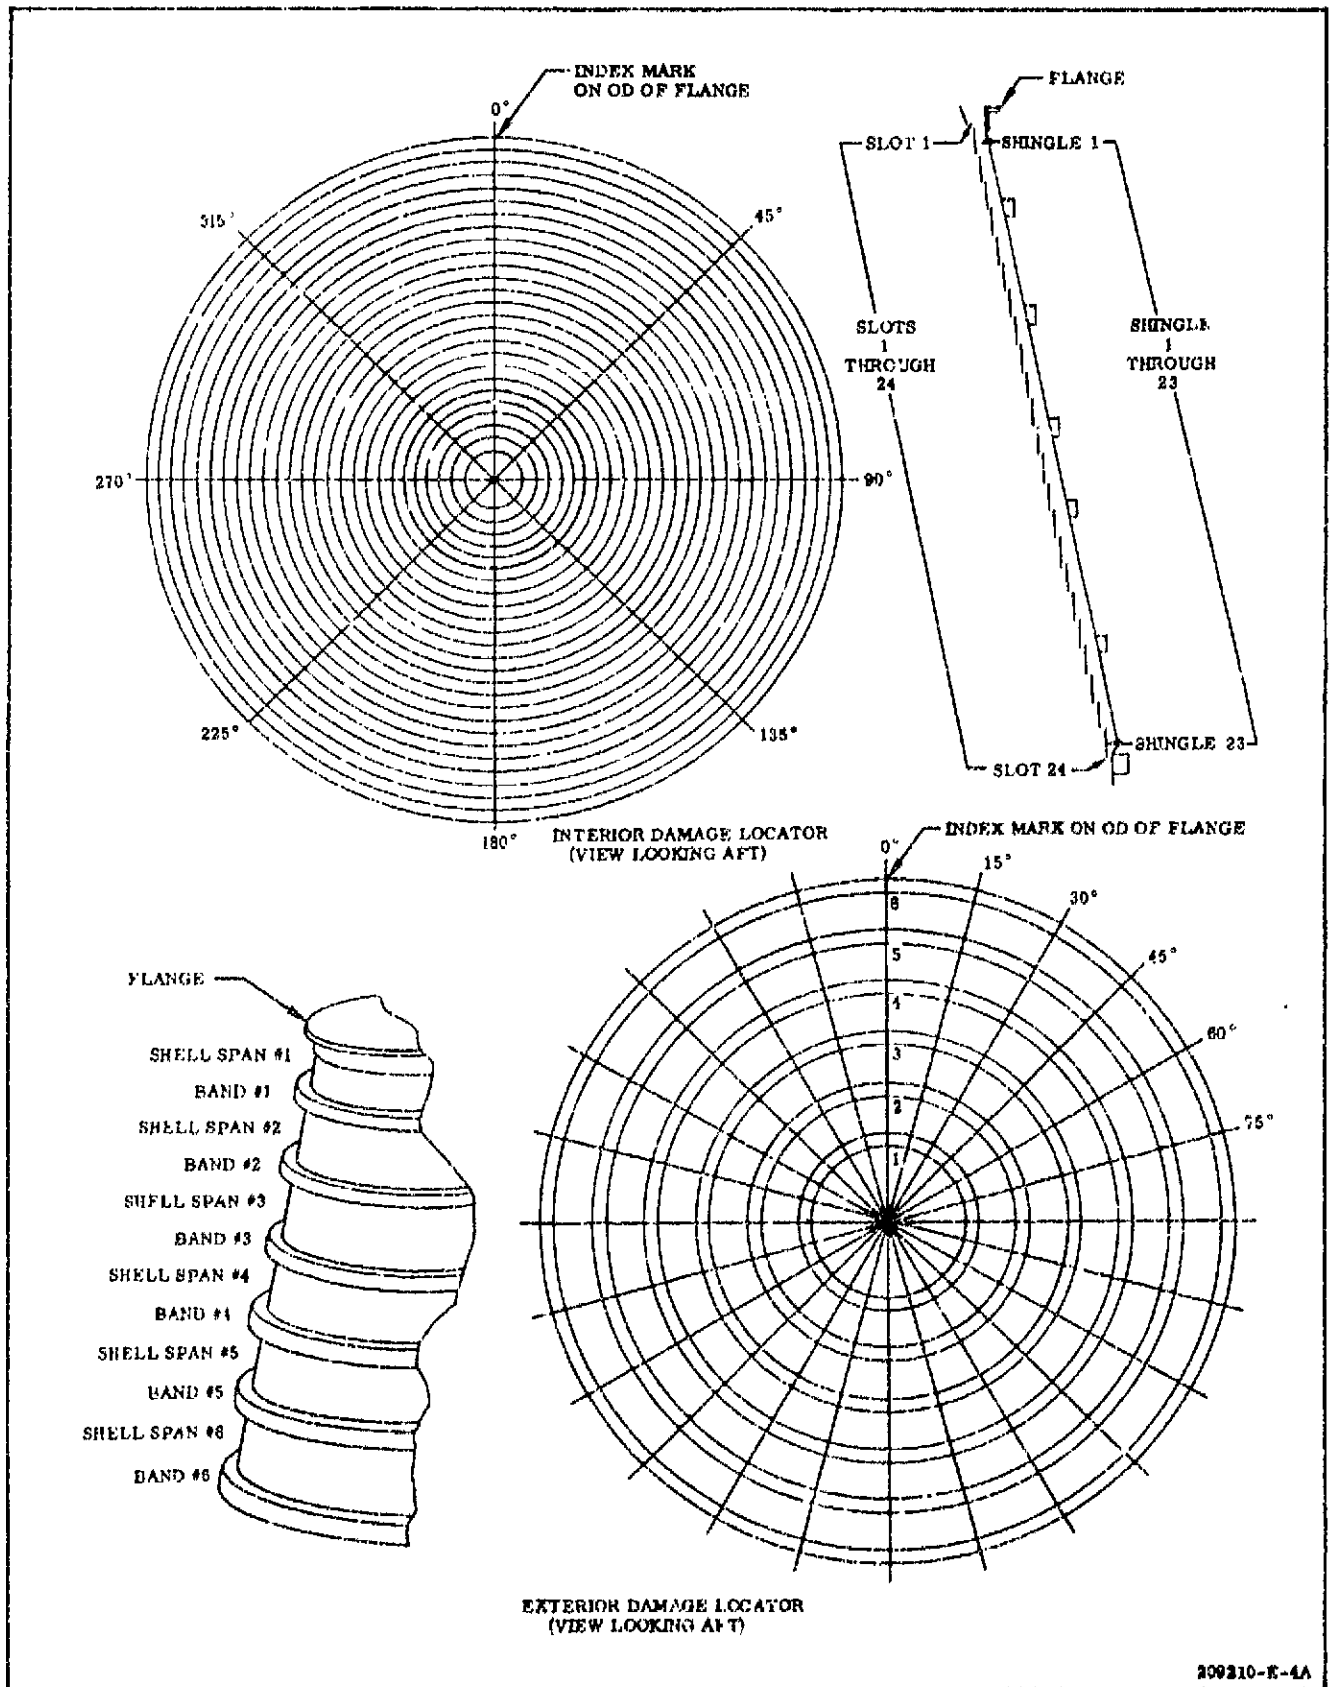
Thrust Chamber Nozzle Damage Locator
